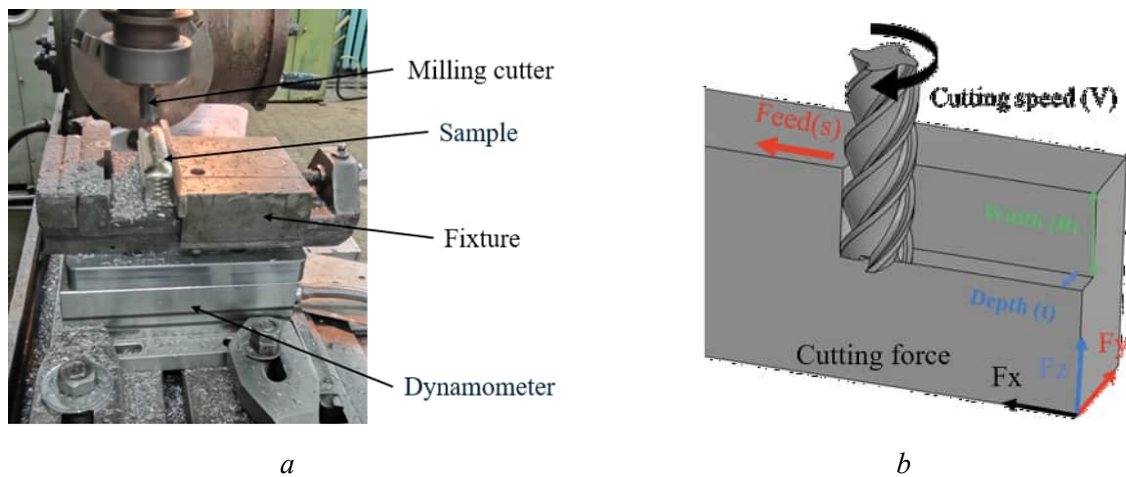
General view of the setup fixed on the milling machine (a); milling scheme (b)
